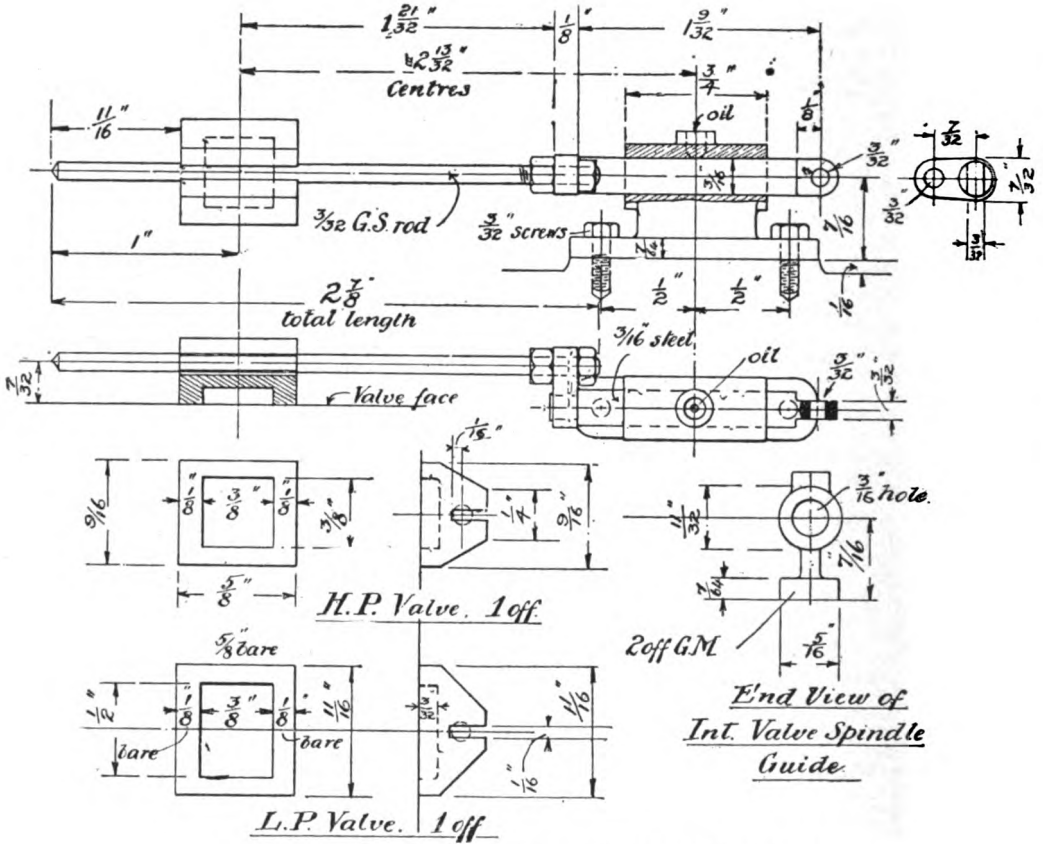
VALVES AND VALVE SPINDLES. (Full size.)
